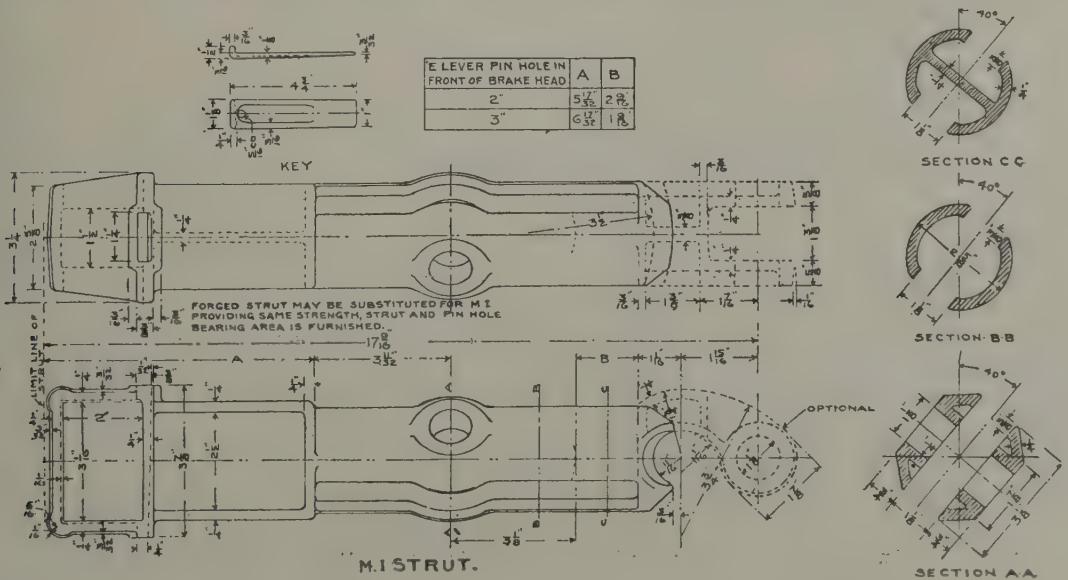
Details of Malleable Iron Strut for No. 2 Brake Beam. (M. C. B. Sheet 17B.)
